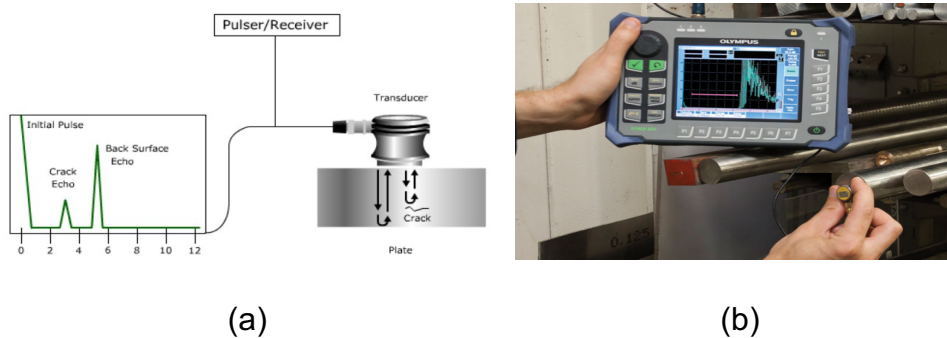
(a) The schematic of Ultrasonic Testing (b) *In-situ* inspection using Ultrasonic Inspection technique.
